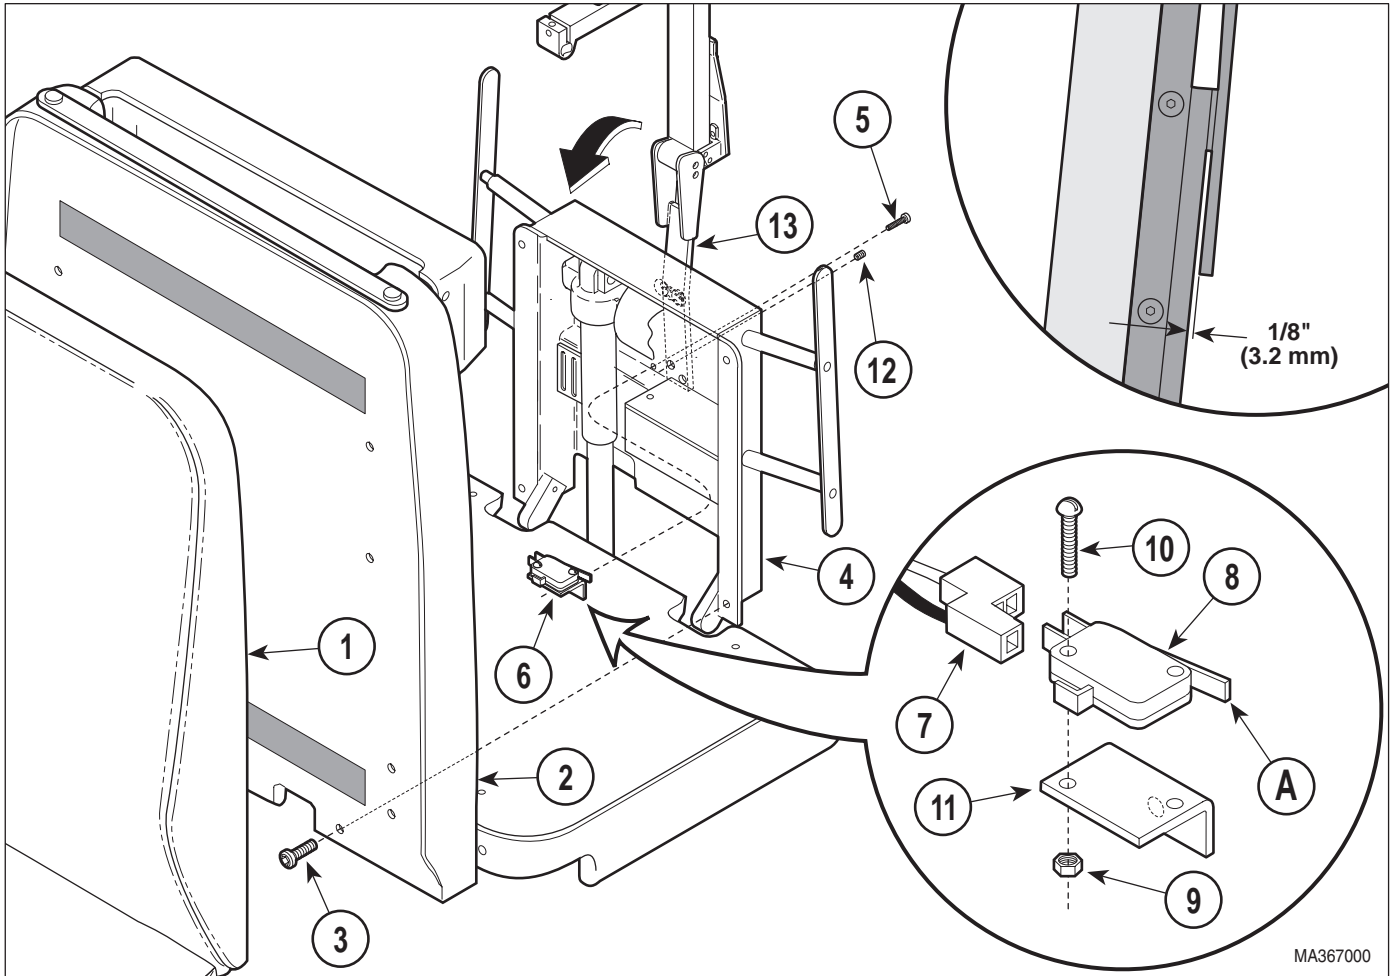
Headlock Limit Switch Removal / Installation / Adjustment
